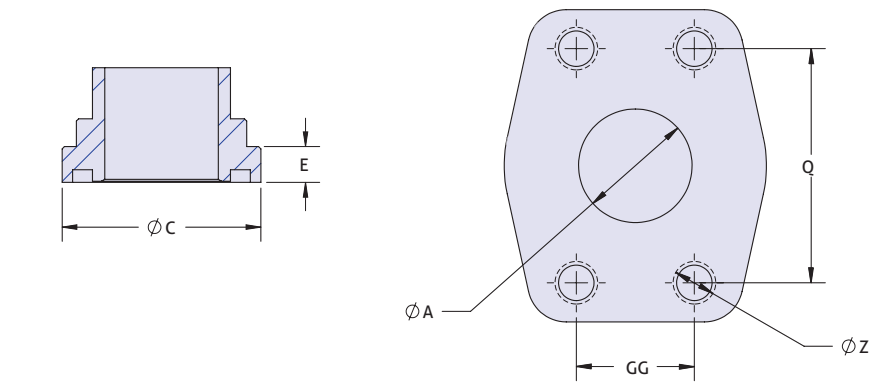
Code 61 and 62 Figures of the flange (Left) and bolt pattern (Right)
